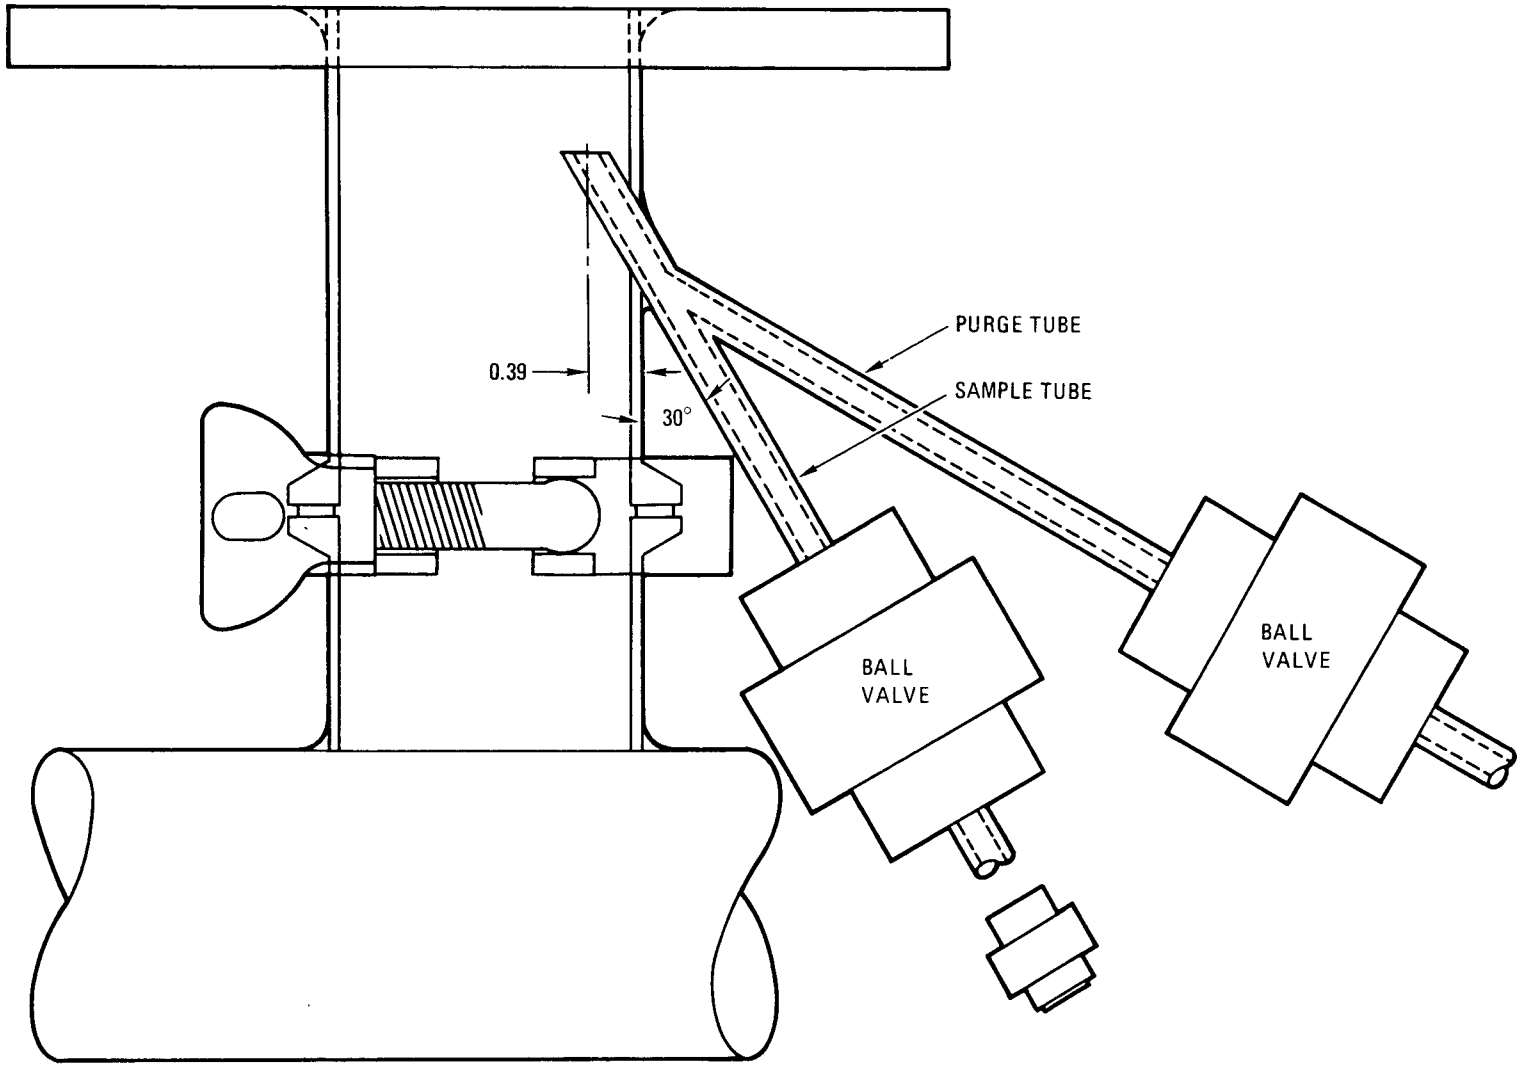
Tube sampler for use below primary burner outlet valve
